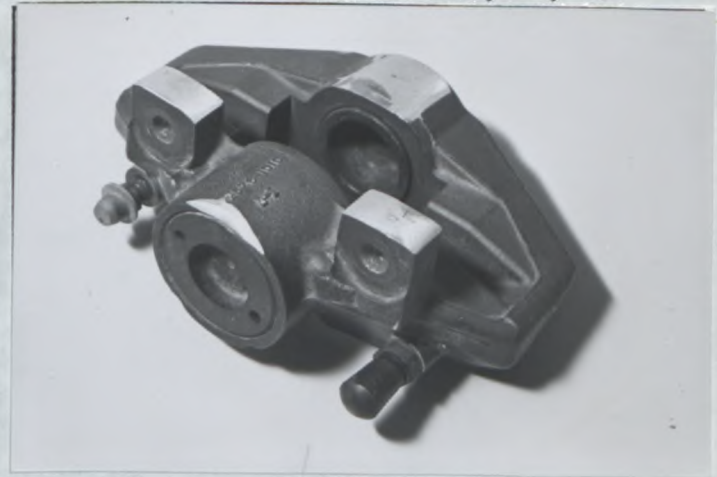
FRONT AND/OR REAR BRAKE CALIPER TYPE 5, 6
